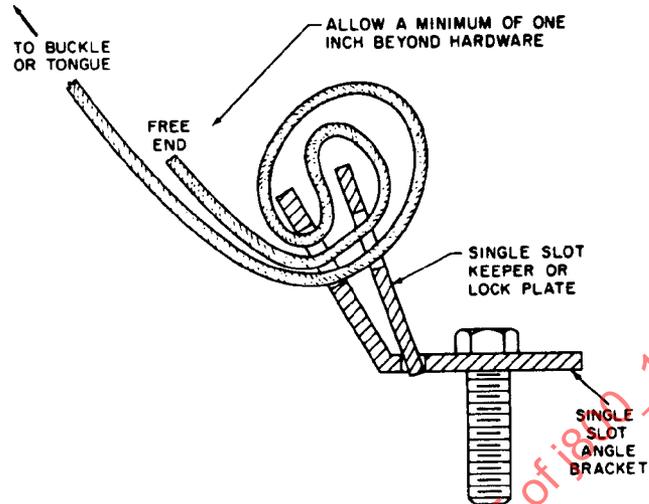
SAME THREADING MAY BE USED FOR TWO-PIECE ANCHOR HOOKS IF EACH PIECE HAS SINGLE SLOT ONLY. AFTER WEBBING HAS BEEN THREADED AND HOOKS HAVE BEEN ASSEMBLED TO EYE BOLT, THE TWO HOOKS MUST BE FASTENED TOGETHER WITH COTTER KEY OR OTHER DEVICE
